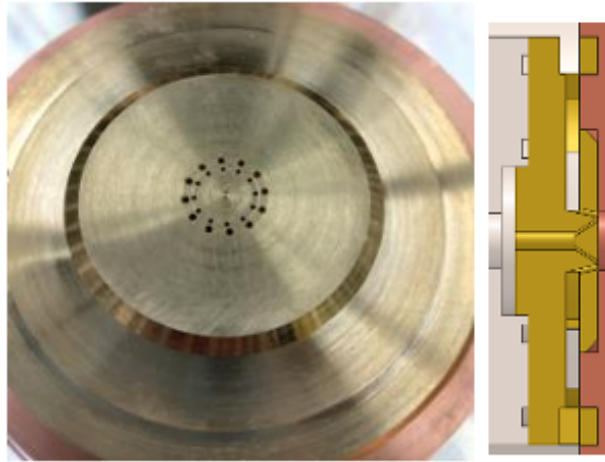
10 mm RDE injector face. Right: front face. Left: cross-sectional view.
